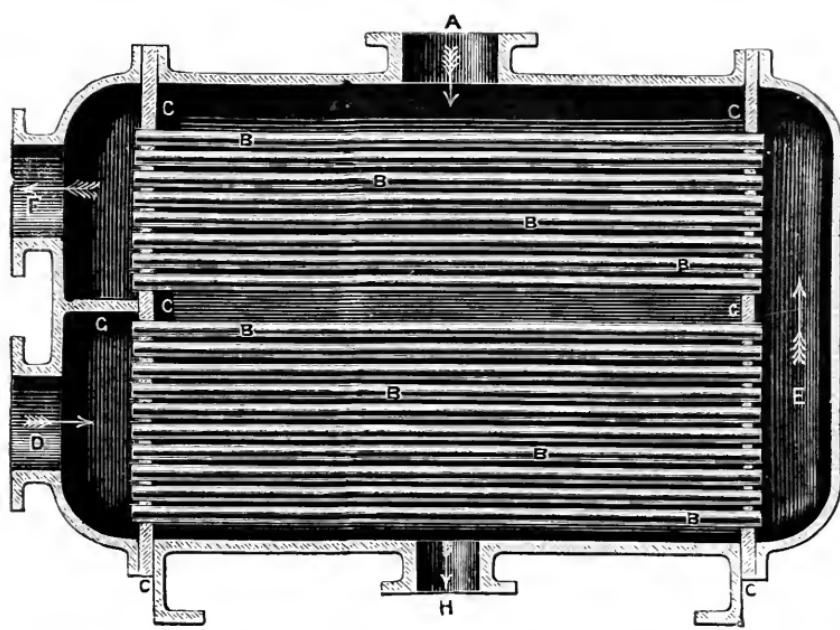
SECTION THROUGH SURFACE CONDENSER.
